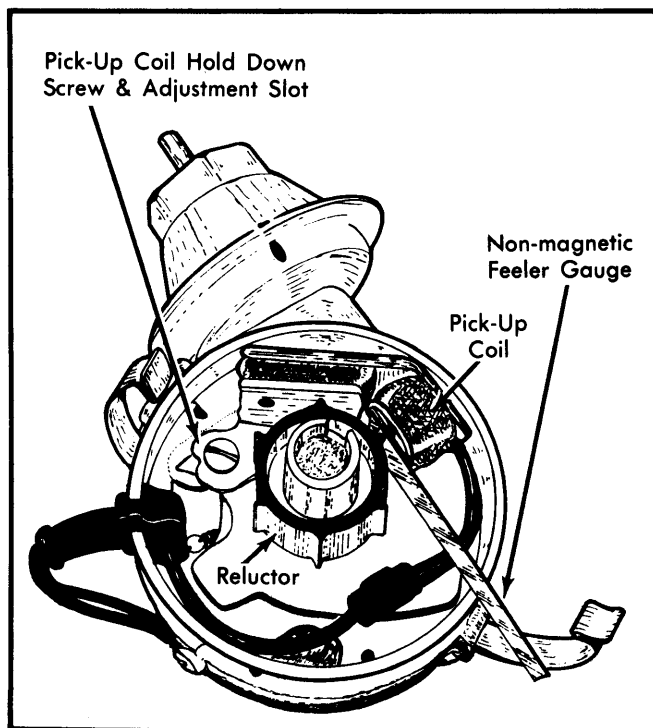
Checking Air Gap Between Reluctor and Pick-up
